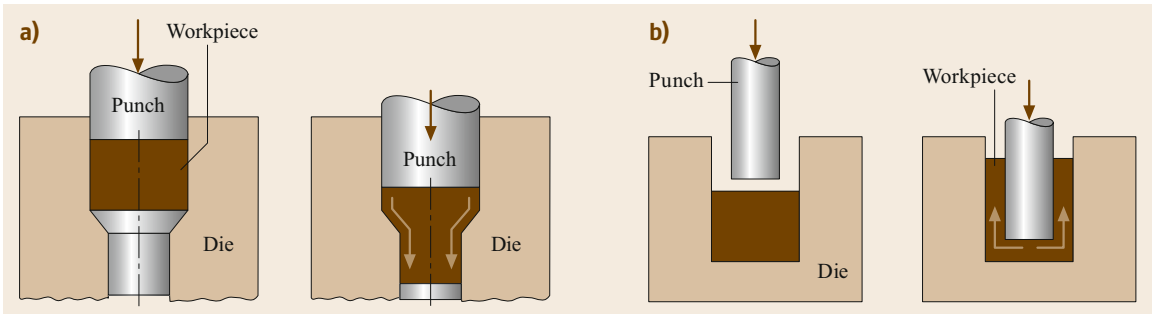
,b Impact extrusion: (a) forward rod extrusion, (b) backward can extrusion
